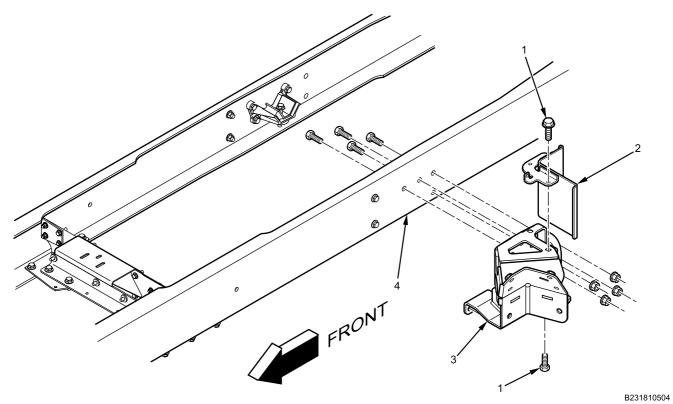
Left Inner Wheel Deflector Bracket Shield.
